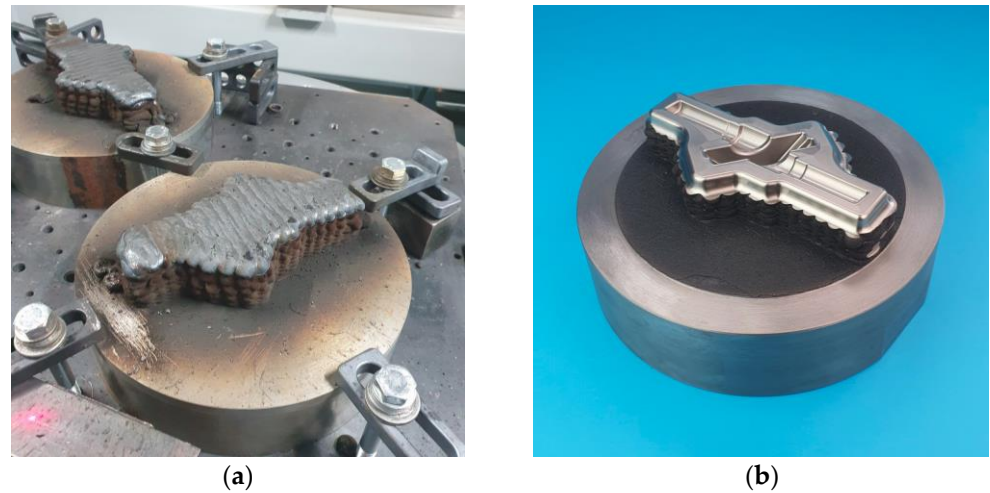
Finished WA-DED parts (a) and the forming die after machining (b).
